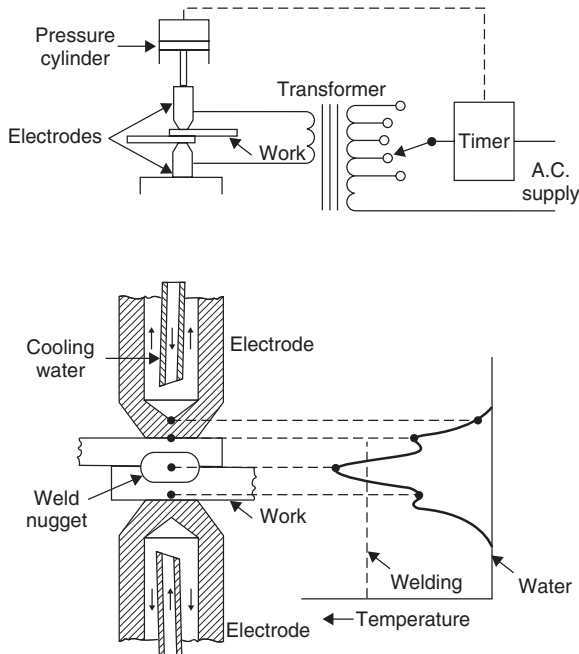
A typical resistance-welding circuit and configuration.
